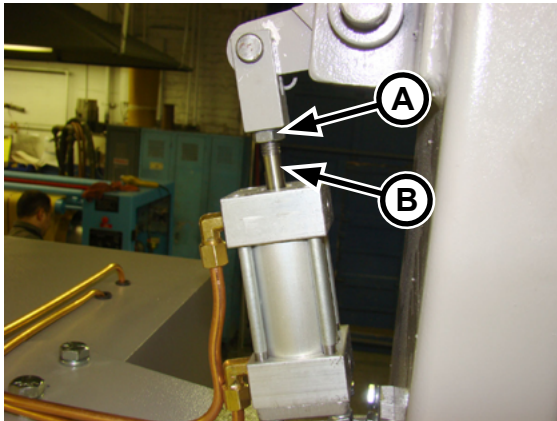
Lift/safety air cylinder mechanical adjustment.
